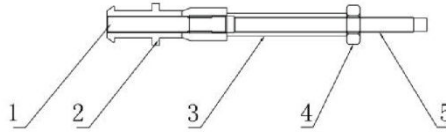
Structural schematic diagram of the disassembly of the expansion rod
